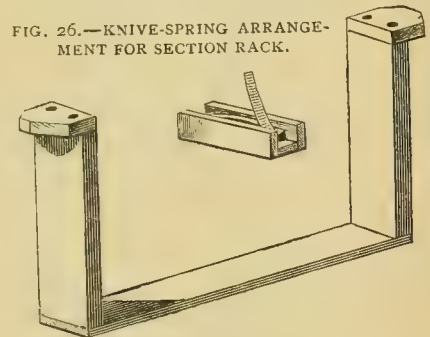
KNIFE-SPRING ARRANGEMENT FOR SECTION RACK.
